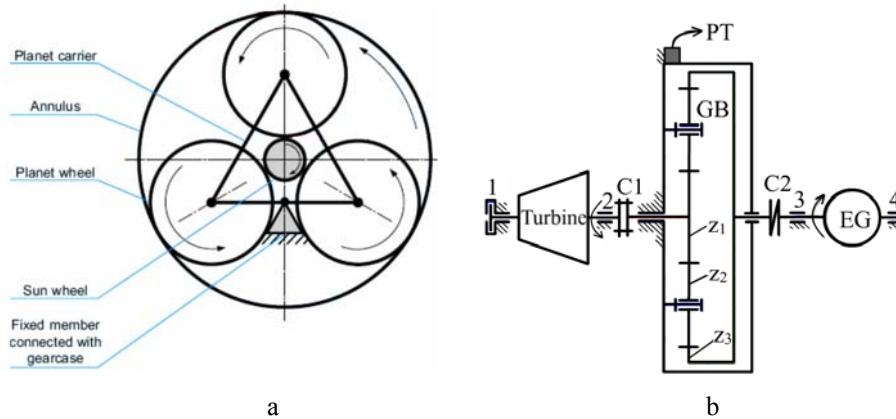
Epicyclic gear unit with fixed planet carrier (a) [6] and the kinematic scheme of turbounit (b)
